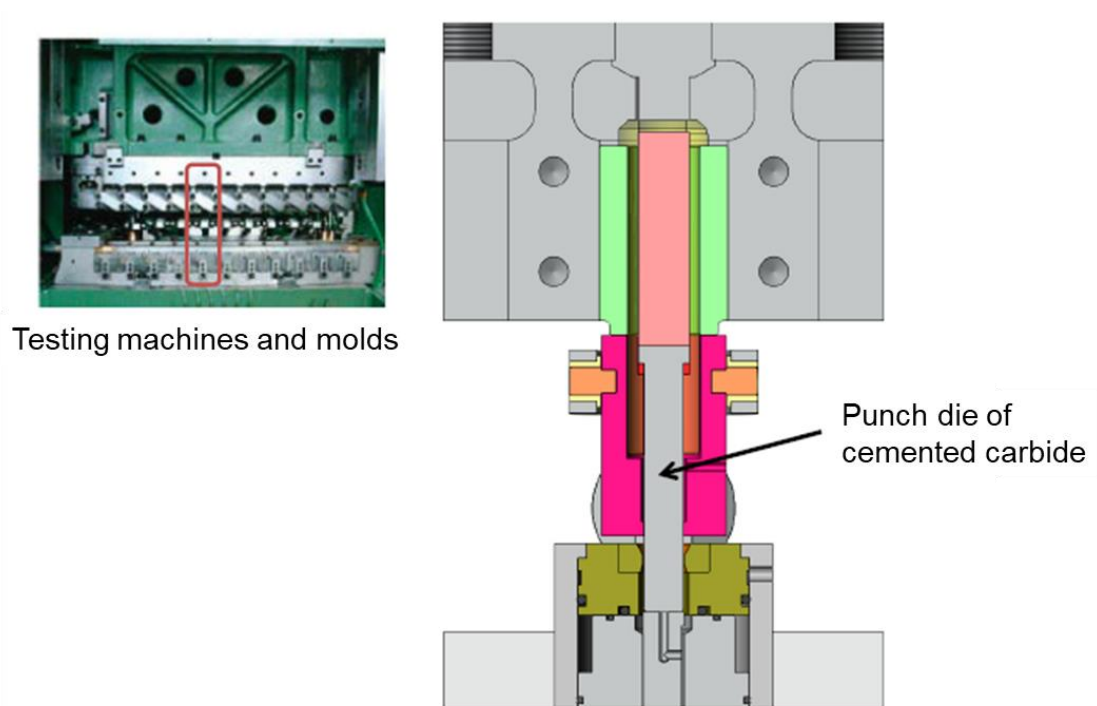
Mounting test of cemented carbide molds fabricated by the LPBF method.
